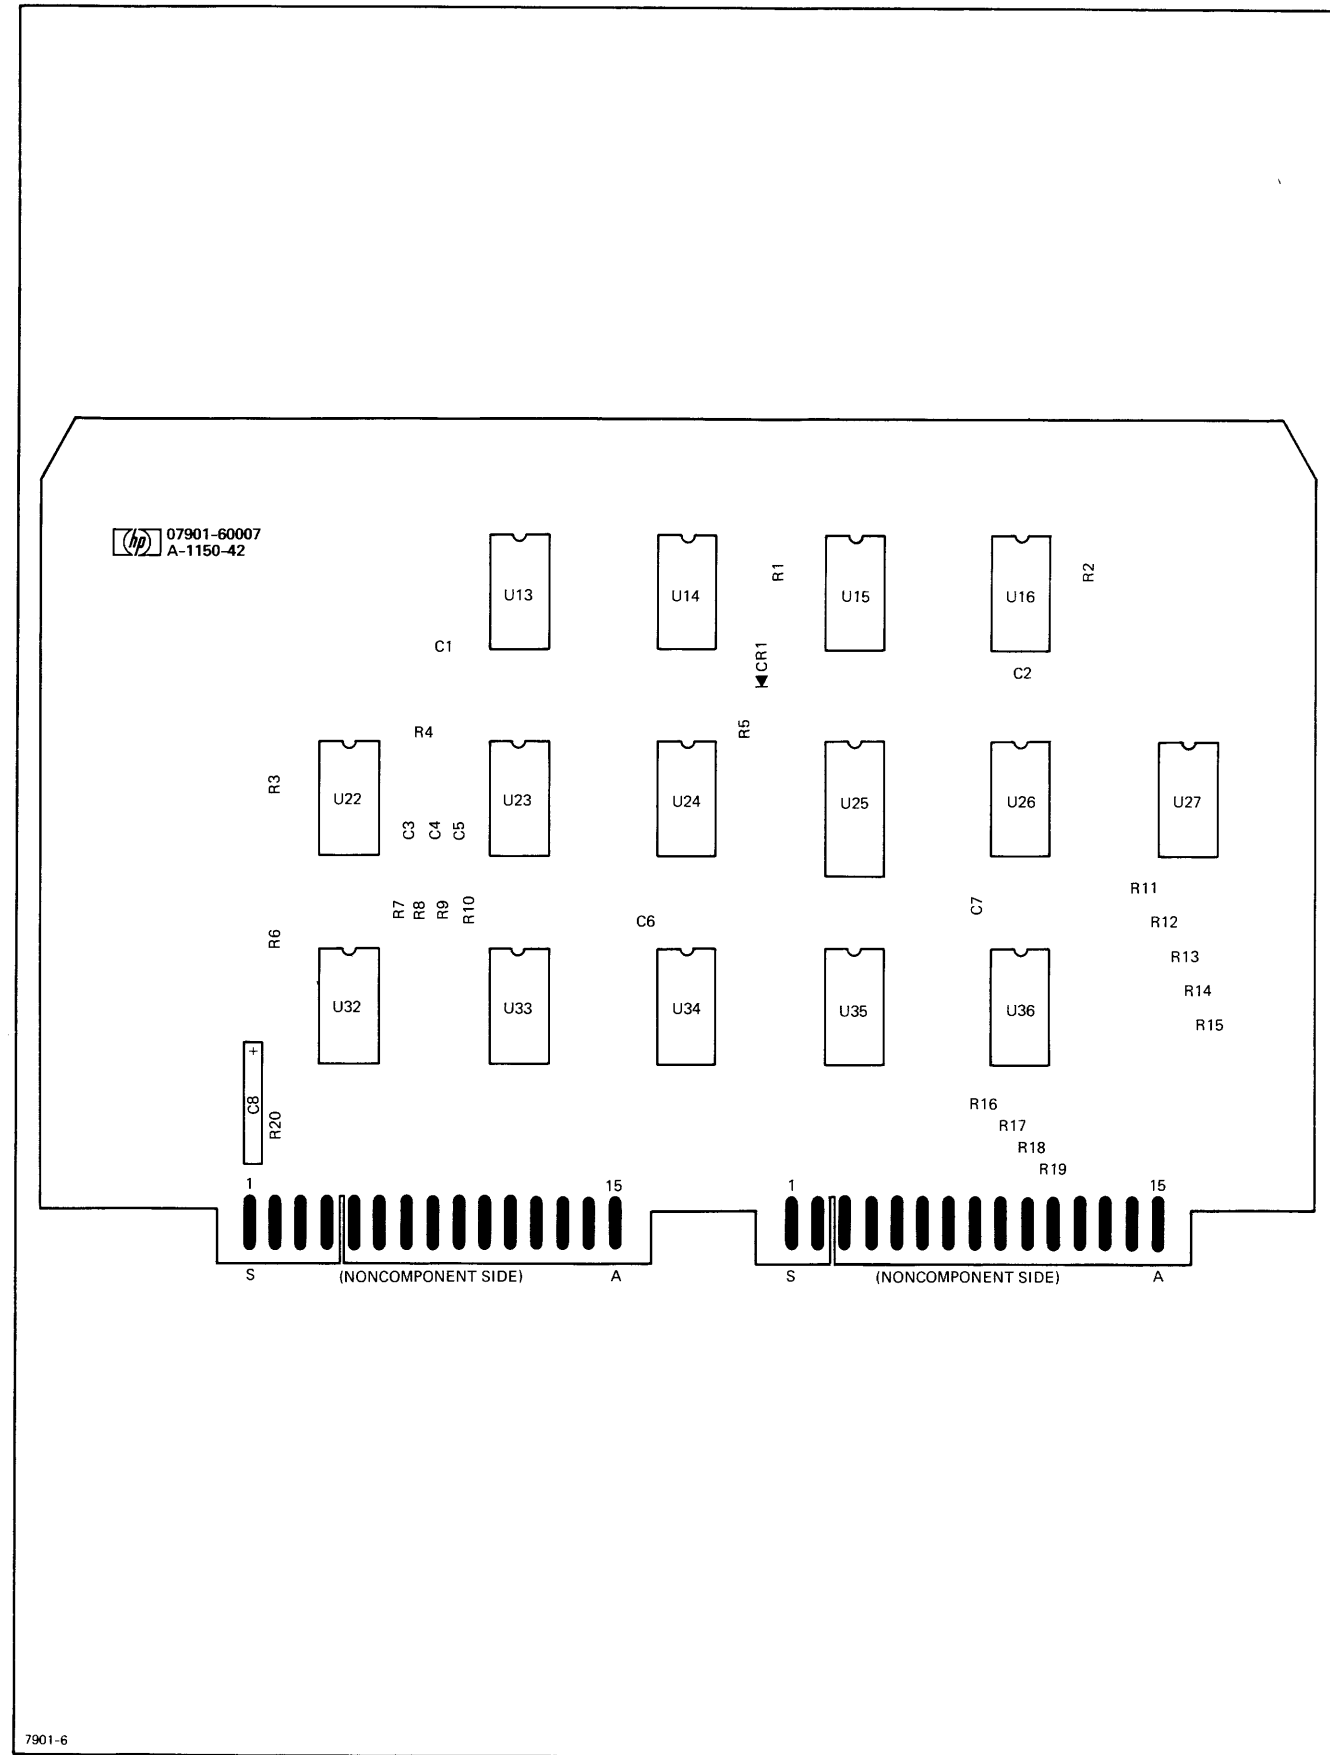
I/O Multiplex PC Assembly A12, Parts Location Diagram
